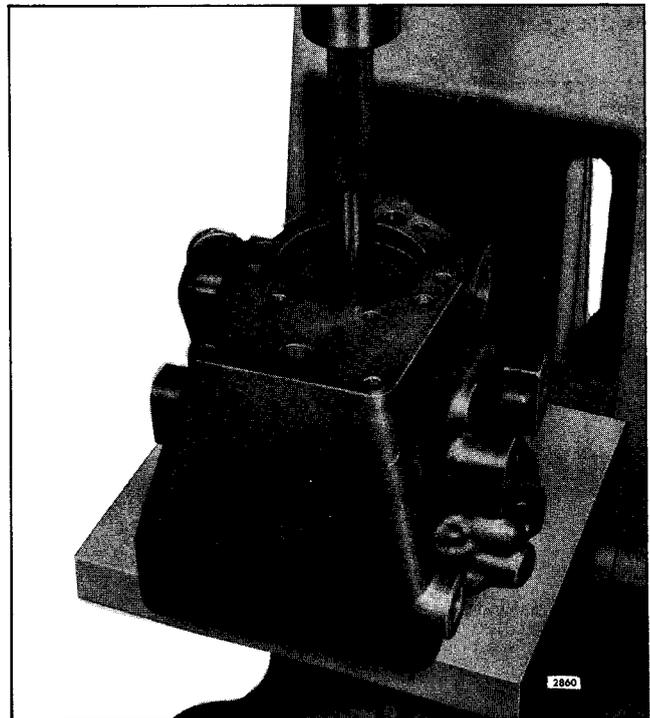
Removing Drive Shaft Bushings from Gear Housing
